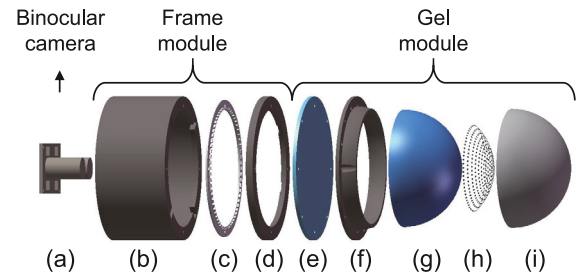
Exploded diagram of the GelStereo Palm 2.0 sensor. (a) Binocular camera. (b) Frame. (c) LEDs. (d) LED frame. (e) Support plate. (f) Support ring. (g) Gel layer. (h) Markers. (i) Coating layer.
